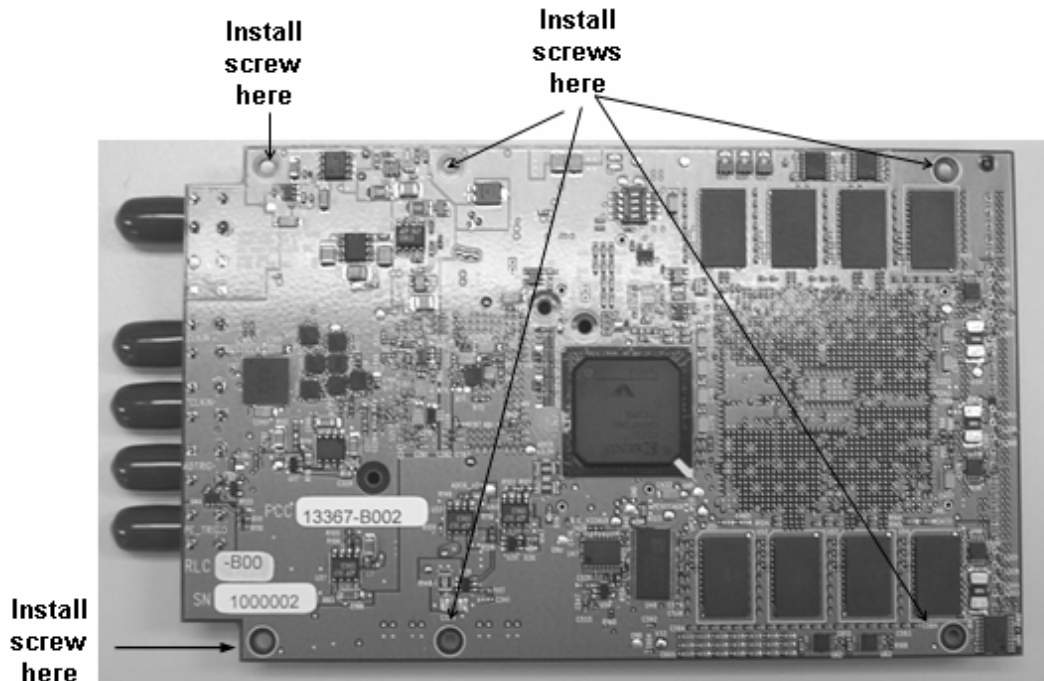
PRO GHz A/D I/O Card (Component Side) Screw Locations
